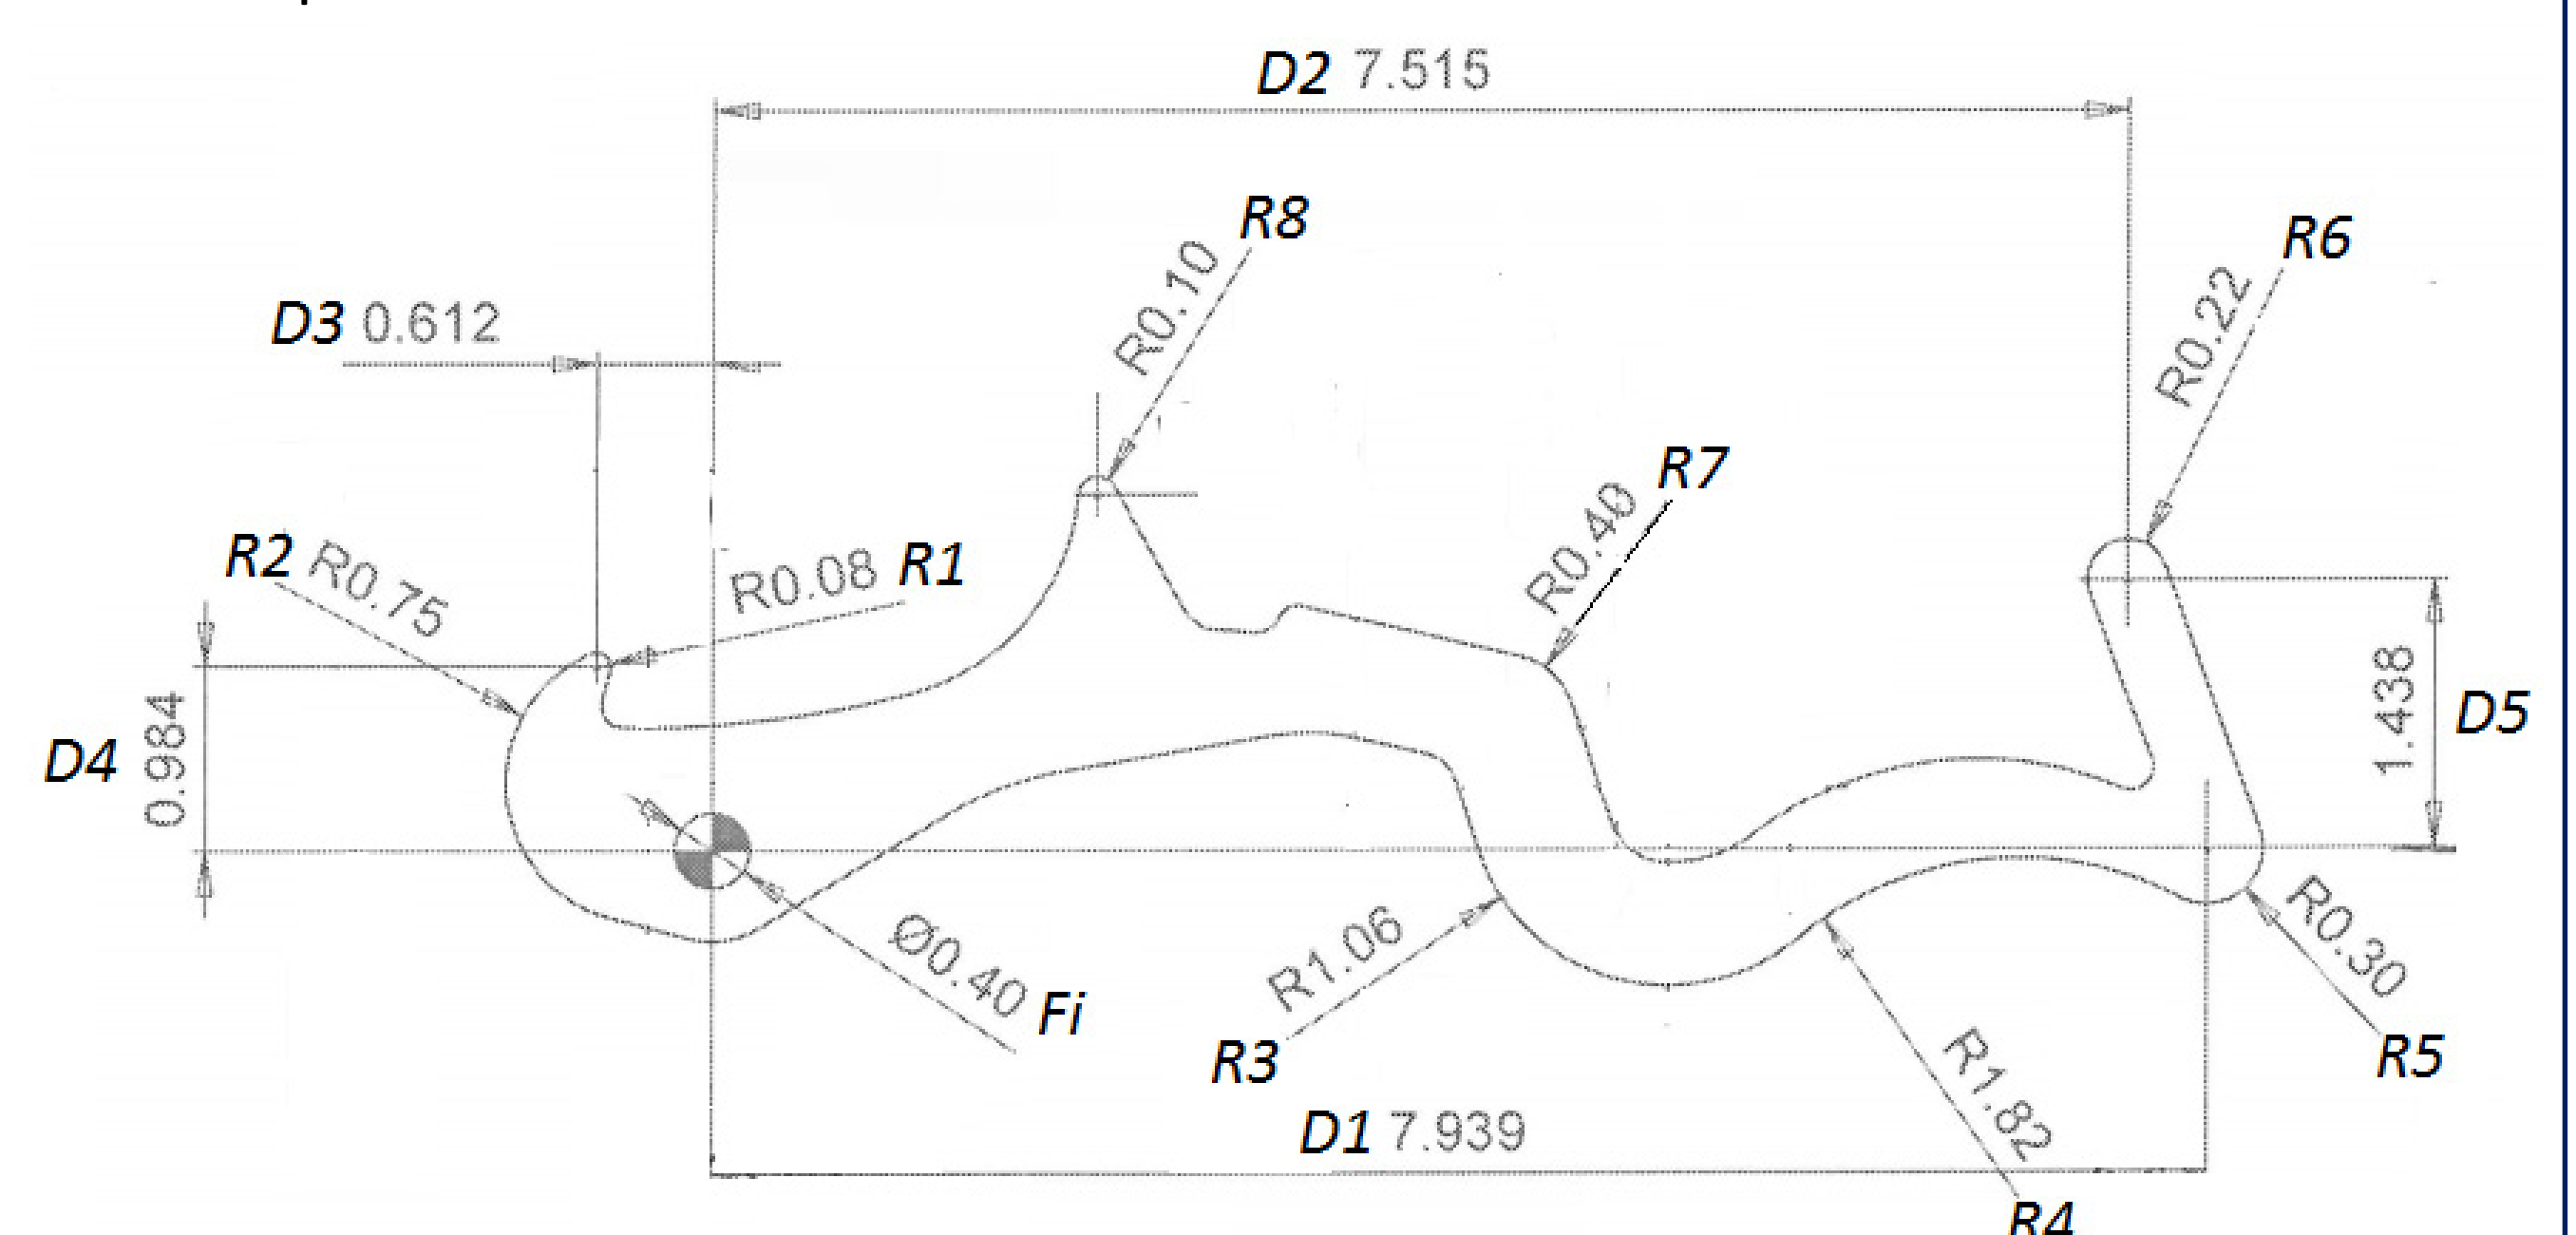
Scheme of micro mechanical component with the nominal values of the examined features of size. Dimensions intended for the sintered parts (final product).
